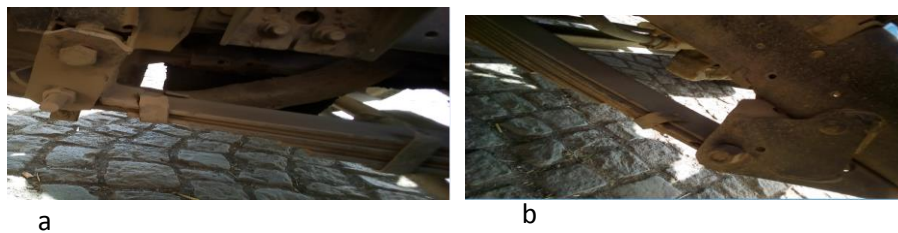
Shackle (a) and fixed (b) end mounting leaf spring
